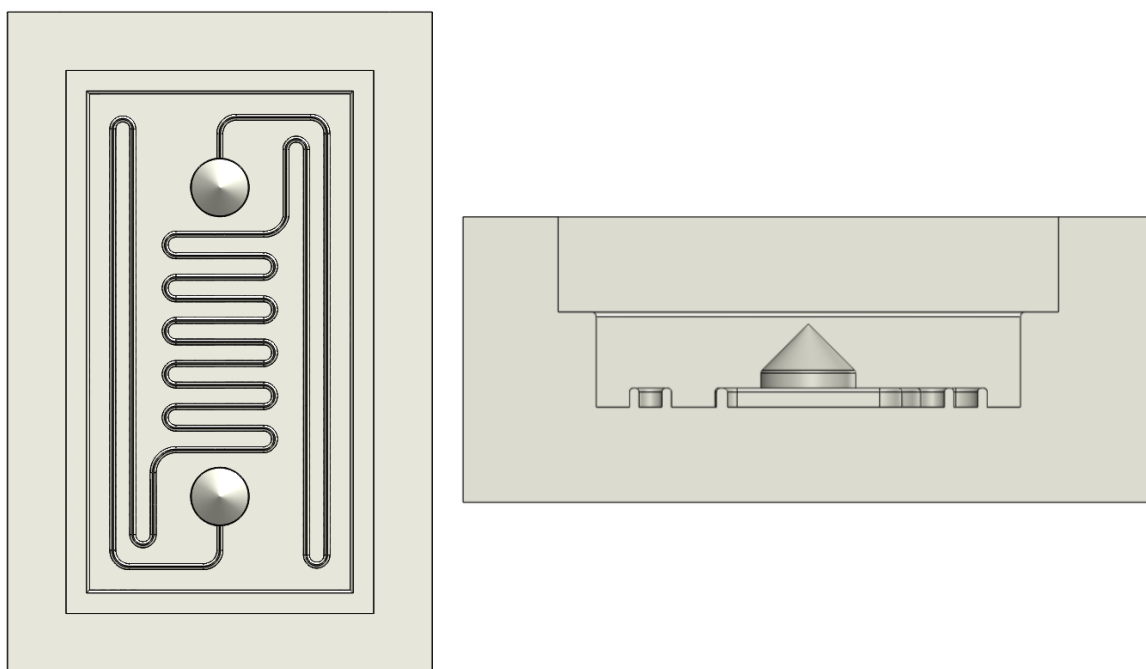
Left: Top view of the 3D printed mold. Right: Cross-sectional view of the mold showing the top shelf feature added to ensure a clean removal of the part to preserve the bonding surface.
